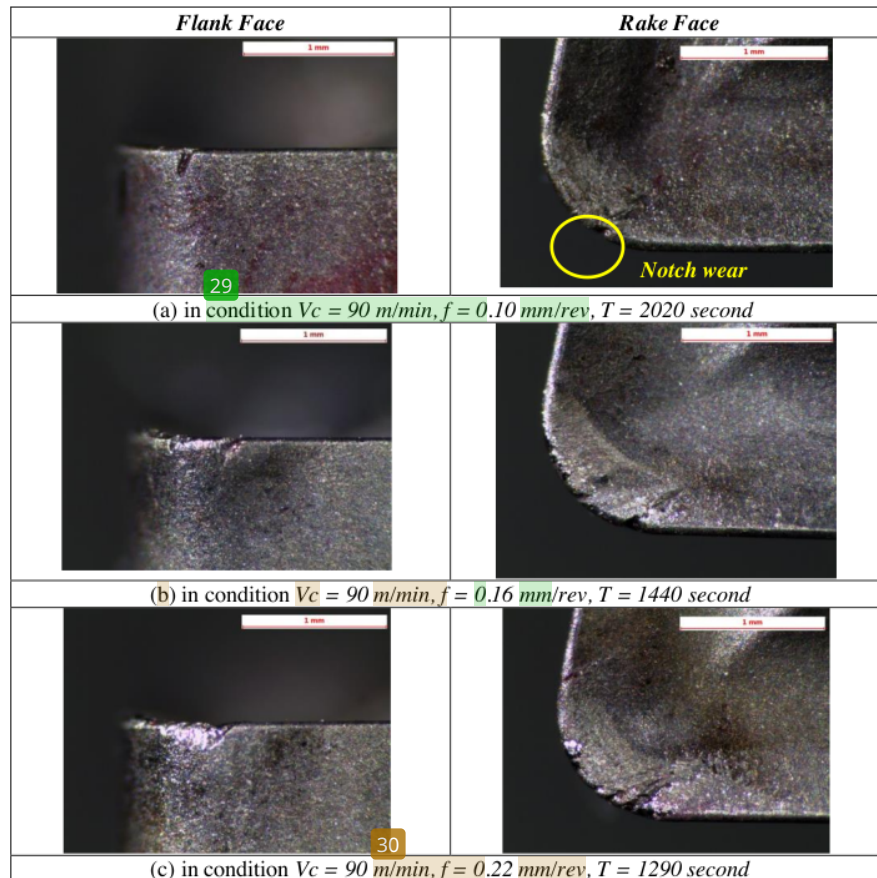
Optical microscope pictures of UTi20T inserts that have experienced wear during the turning process of austenitic stainless steel
